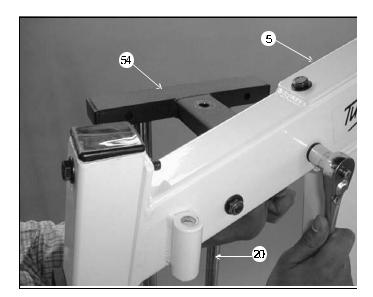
Maneuver each of the Guide Rods (#20) into the holes on the bottom side of the Guide Rod Retainer (#54). Next, mount the Guide Rod Retainer (#54) along with the two captive Guide Rods (#20) to the side of the Top Pulley Assembly (#5). Secure this assembly using two Hex Head Cap Screws 3/8-16 X 3 (#94), four Flat Washers SAE 3/8 (#90) and two Nylon Insert Jam Lock Nuts 3/8-16 (#86).
